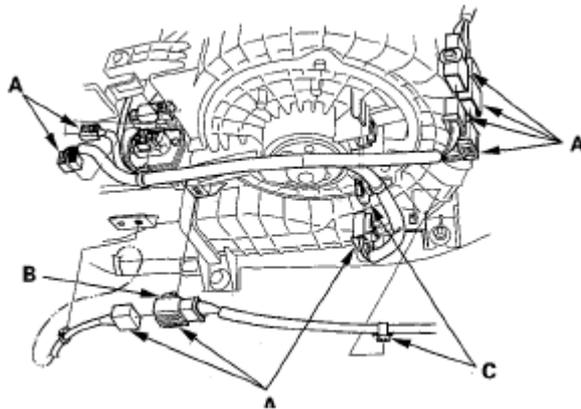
Identifying Wire Harness Clips, Connector Clip And Connectors At Blower Unit
